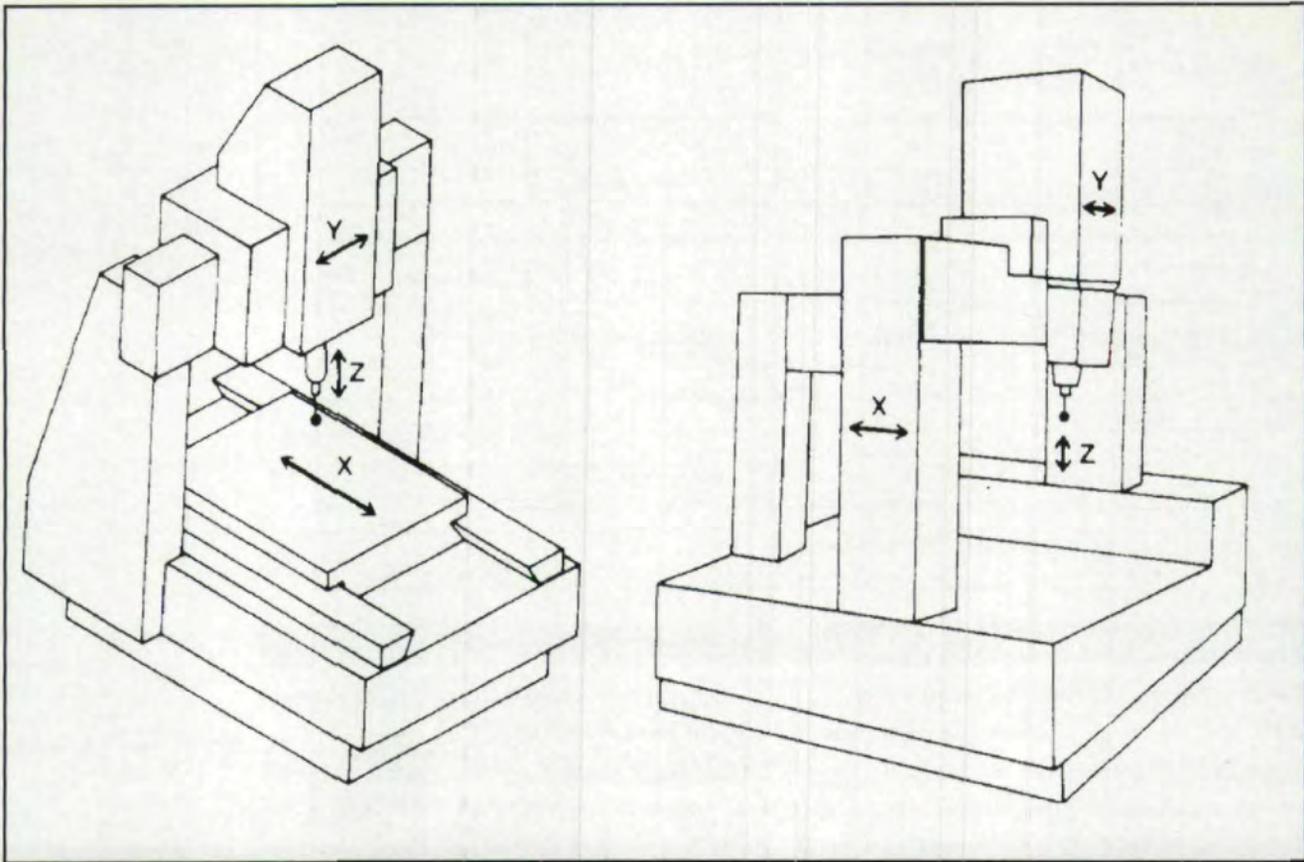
General purpose three-dimensional coordinate measuring machine
